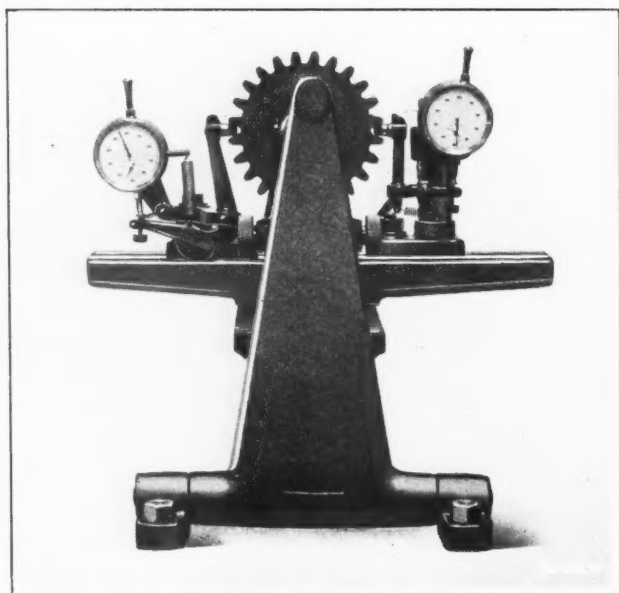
Gear Testing Machine set up for Measuring the Eccentricity and Pitch of Spur Gears
